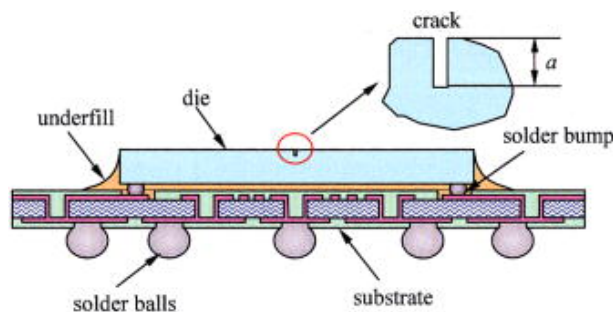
Schematic cross sectional view of die cracking in flip chip BGA package (Han, 2001)
